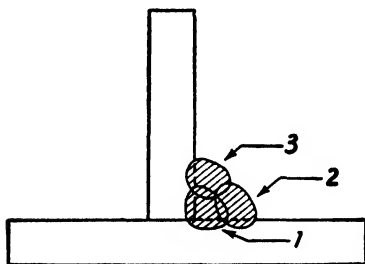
In multiple-pass fillet welds in flat and horizontal positions, place the second bead on the horizontal surface to form a support for the third one.
